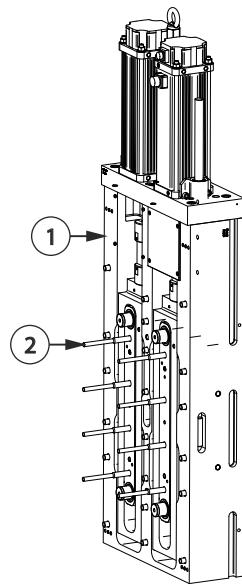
Back Mounted Cam Driven Actuation Assembly
